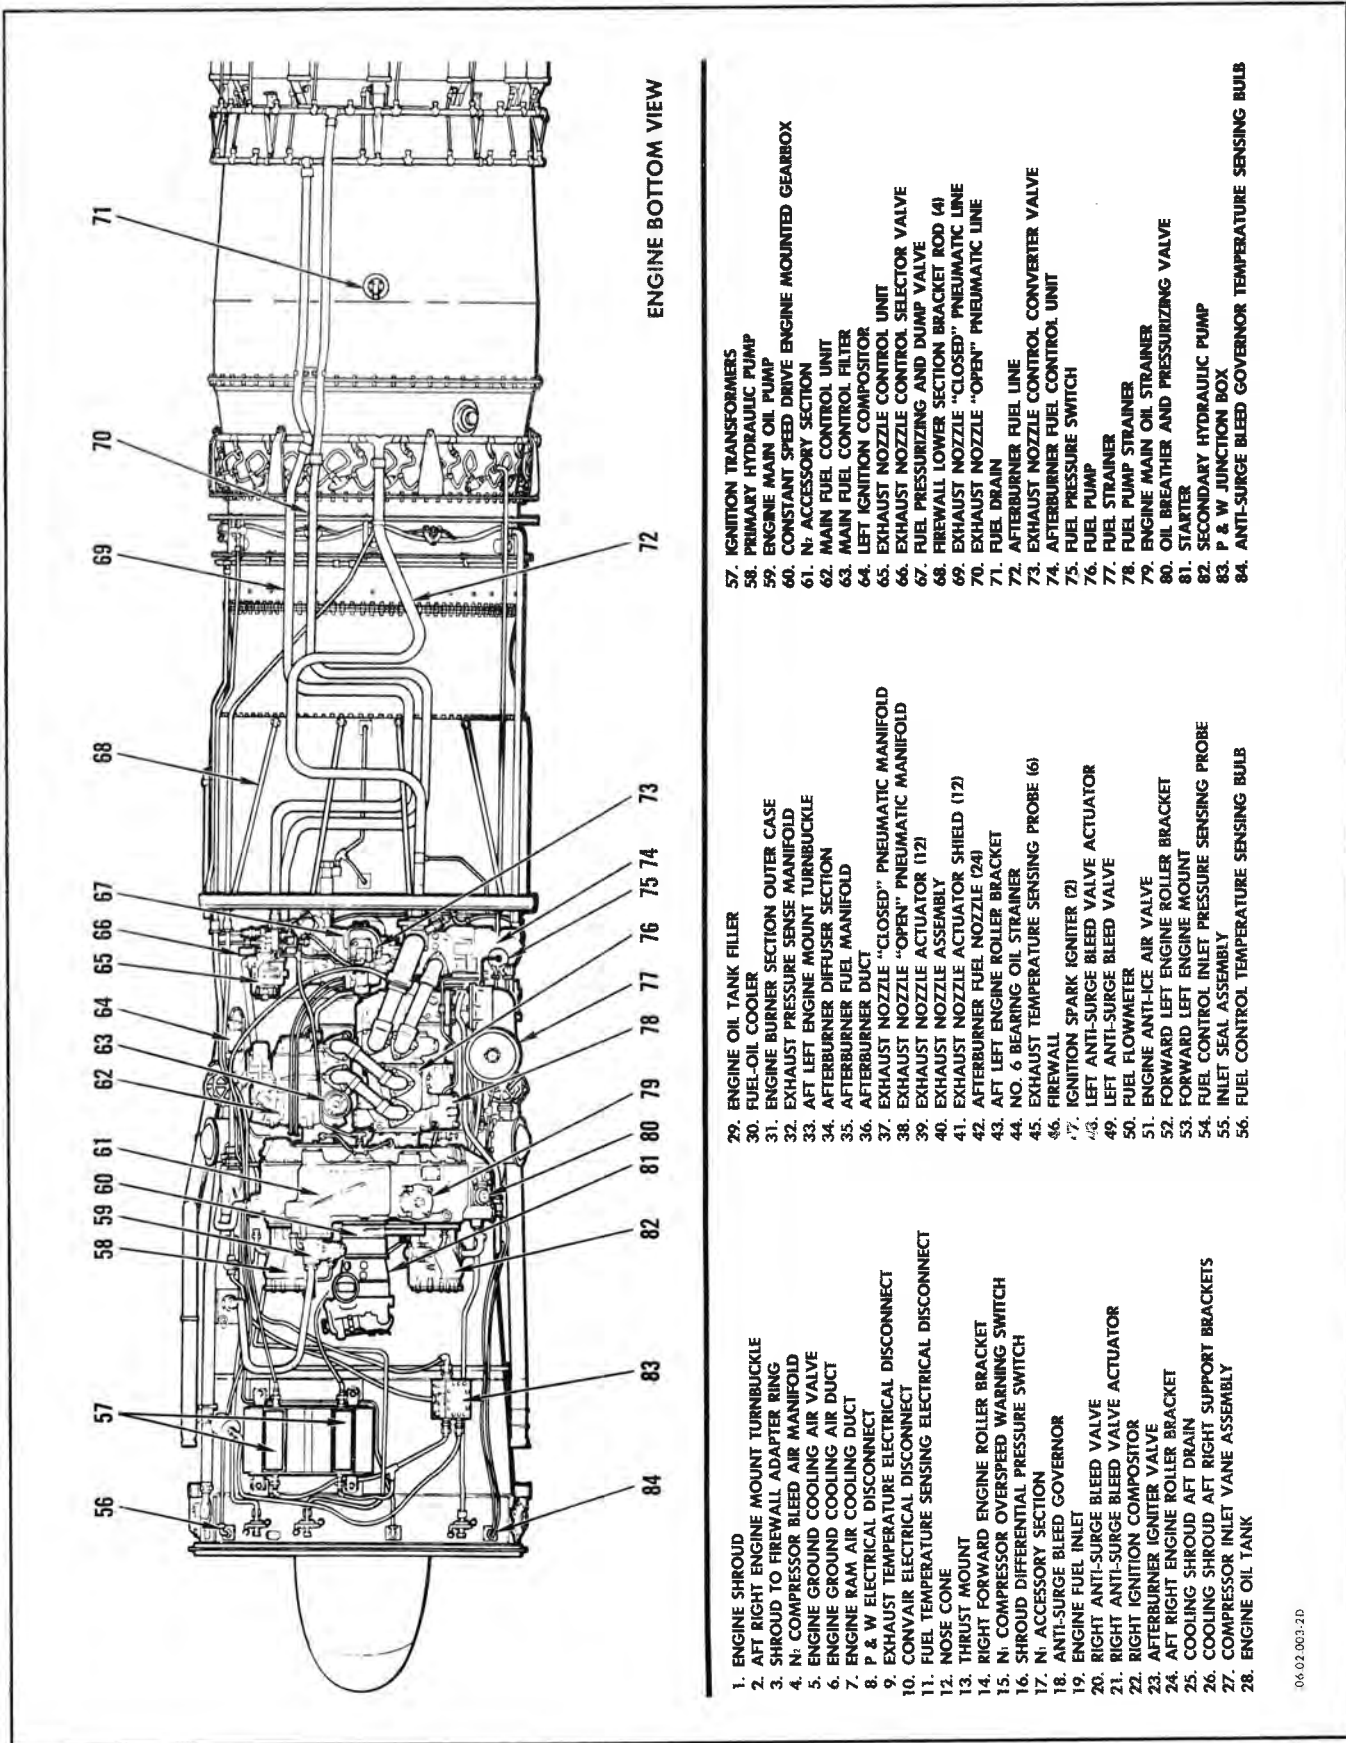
Engine Assembly (Sheet 1 of 2)
